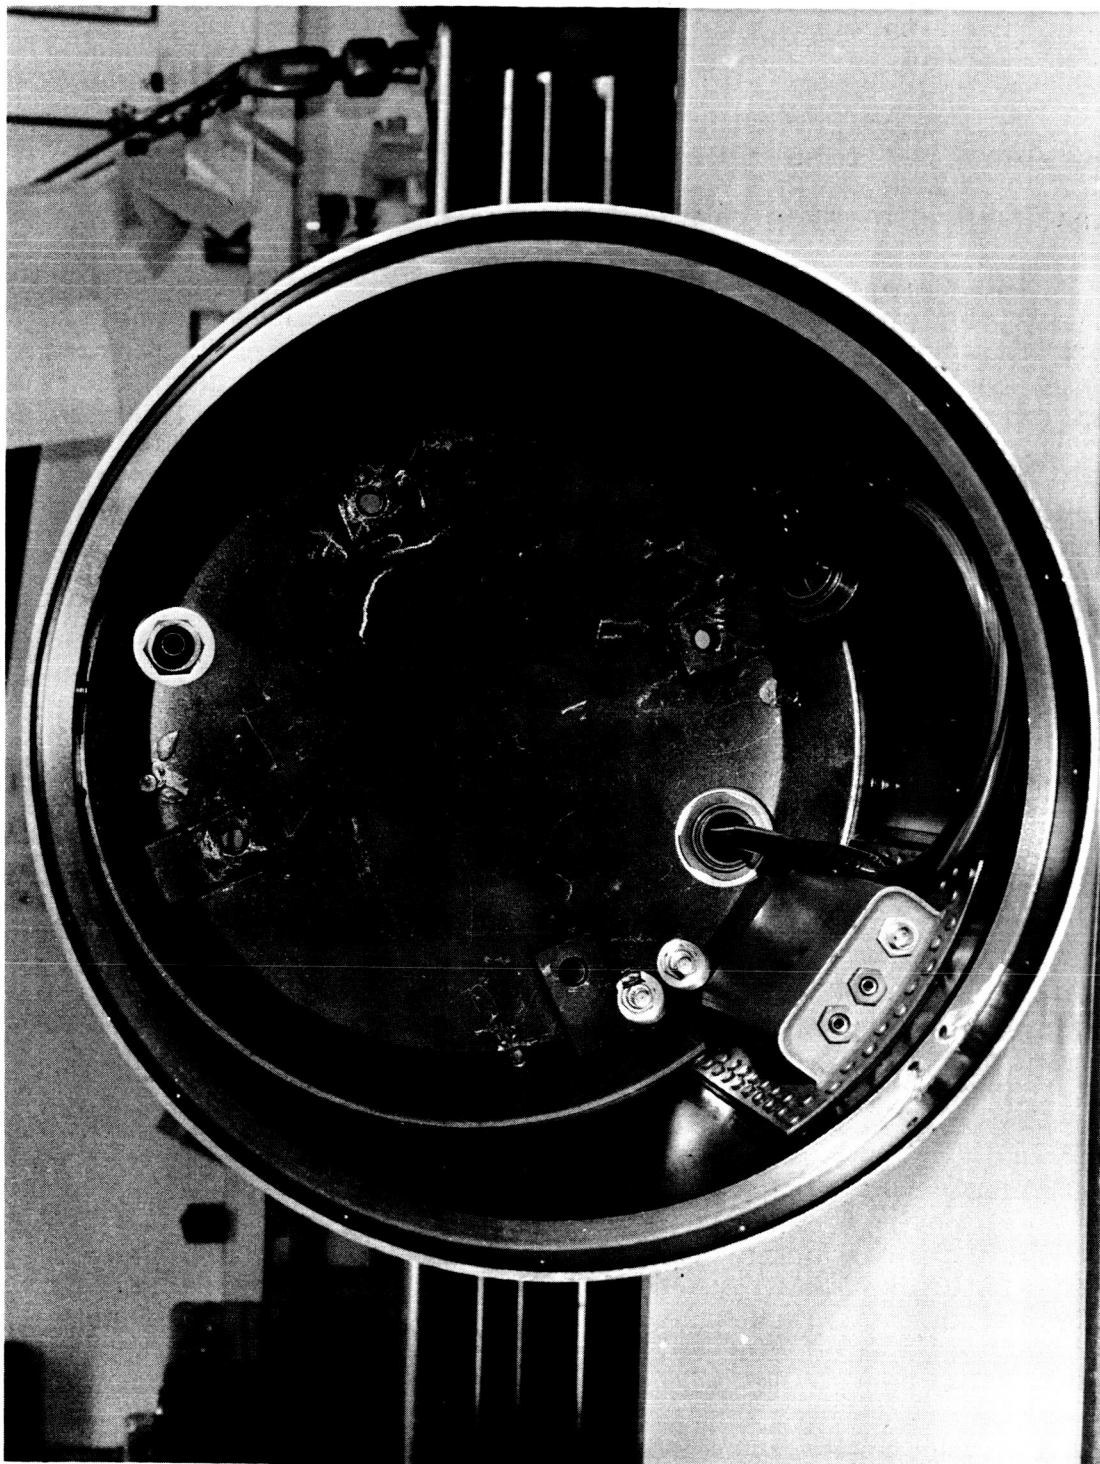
Inside view, of top bulkhead after all machining has been done and fittings have been installed.
